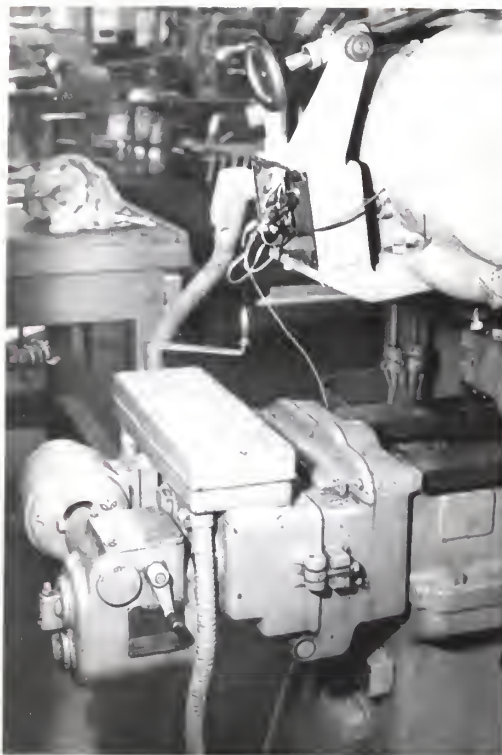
FEED MECHANISM AND CUTTER MOTOR
